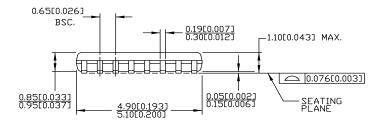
16-pin TSSOP (4.40 mm Body) Z16.173/ZZ16.173 Package Outline, 51-85091
